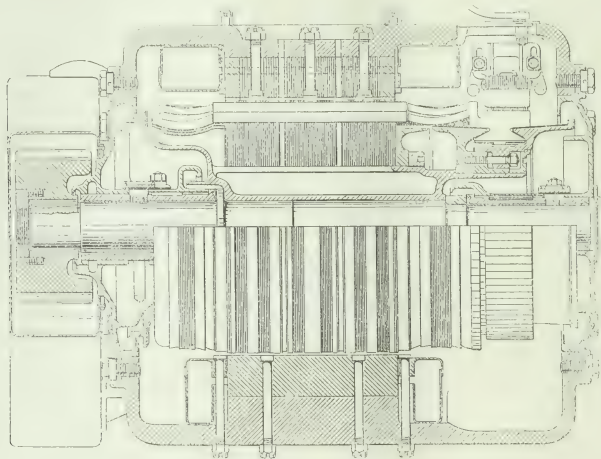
FIG. A.—Longitudinal section through 200-h.p. 1,200-volt motor.
